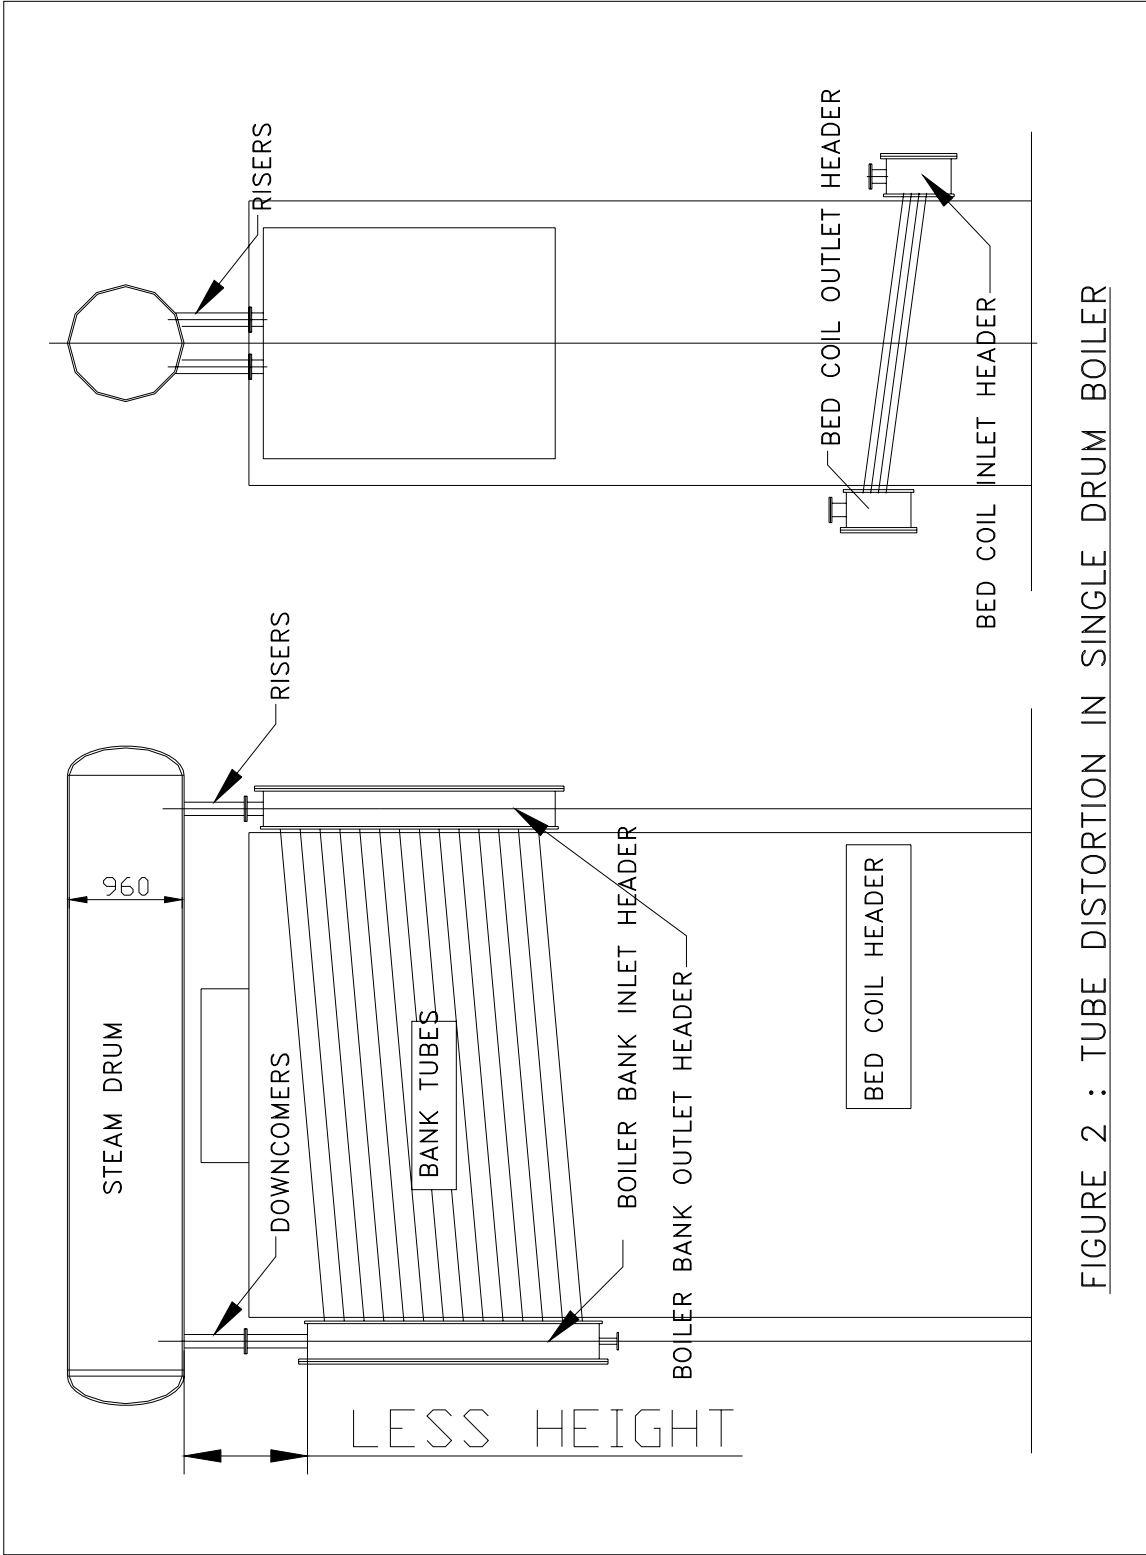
TUBE DISTORTION IN SINGLE DRUM BOILER
